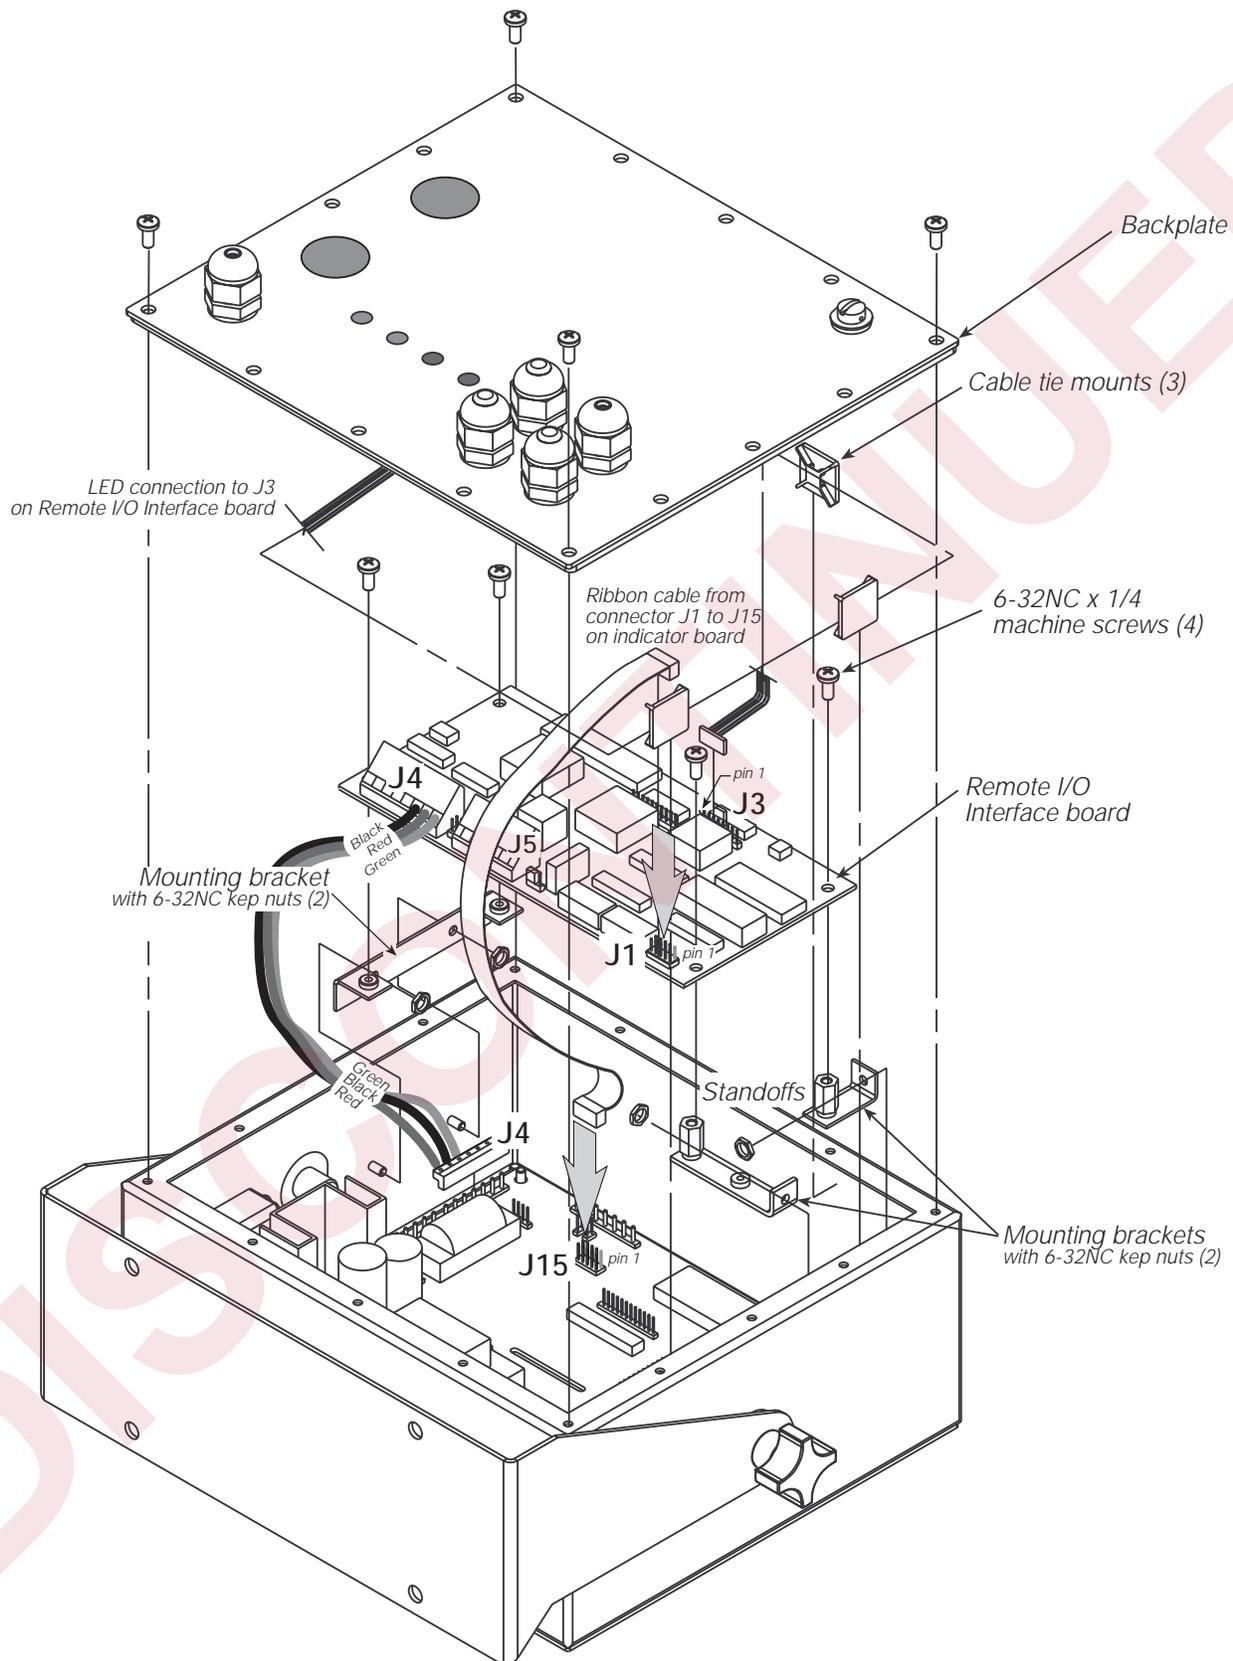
Remote I/O Interface Board Installation and Wiring
